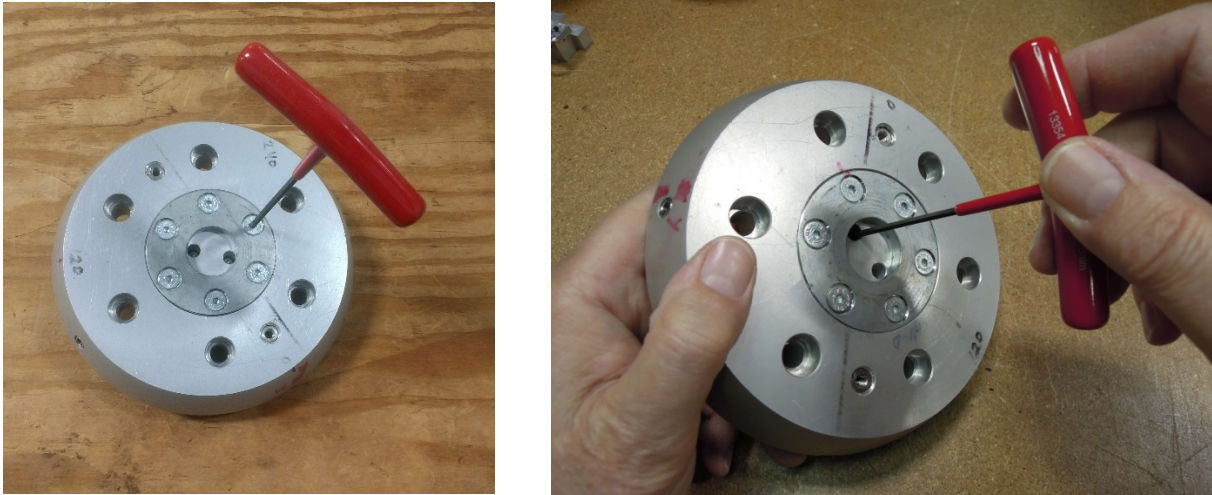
(Left) Attachment of back plate disc to back plate; (Right) Installation of the triaxial accelerometer mount block to the back plate assembly
